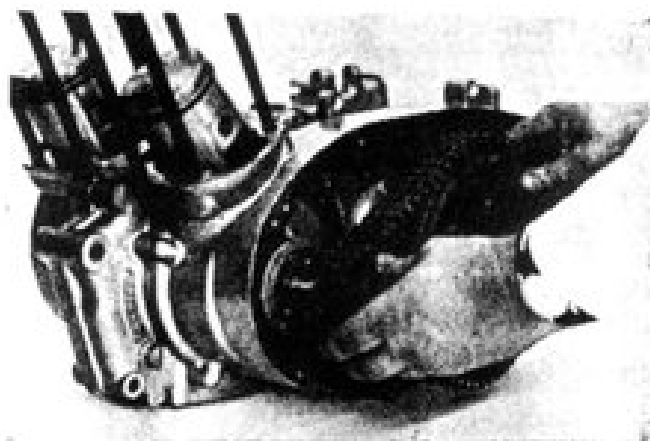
Removal of clutch outer drum and crankshaft sprocket.
